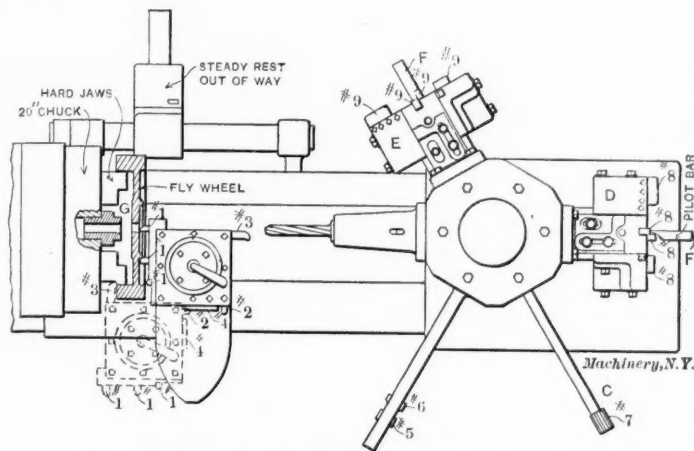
Finishing a Fly-wheel in the Libby Turret Lathe. First part of First Operation.
